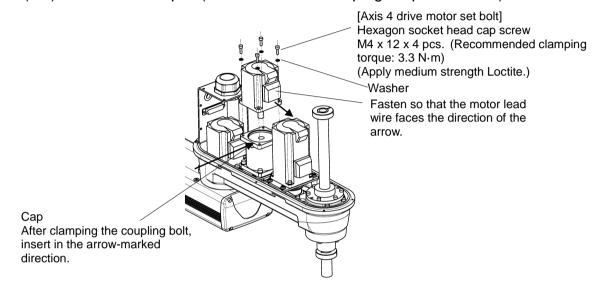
Mounting axis 4 motor (KHL-500, KHL-600, KHL-700)
